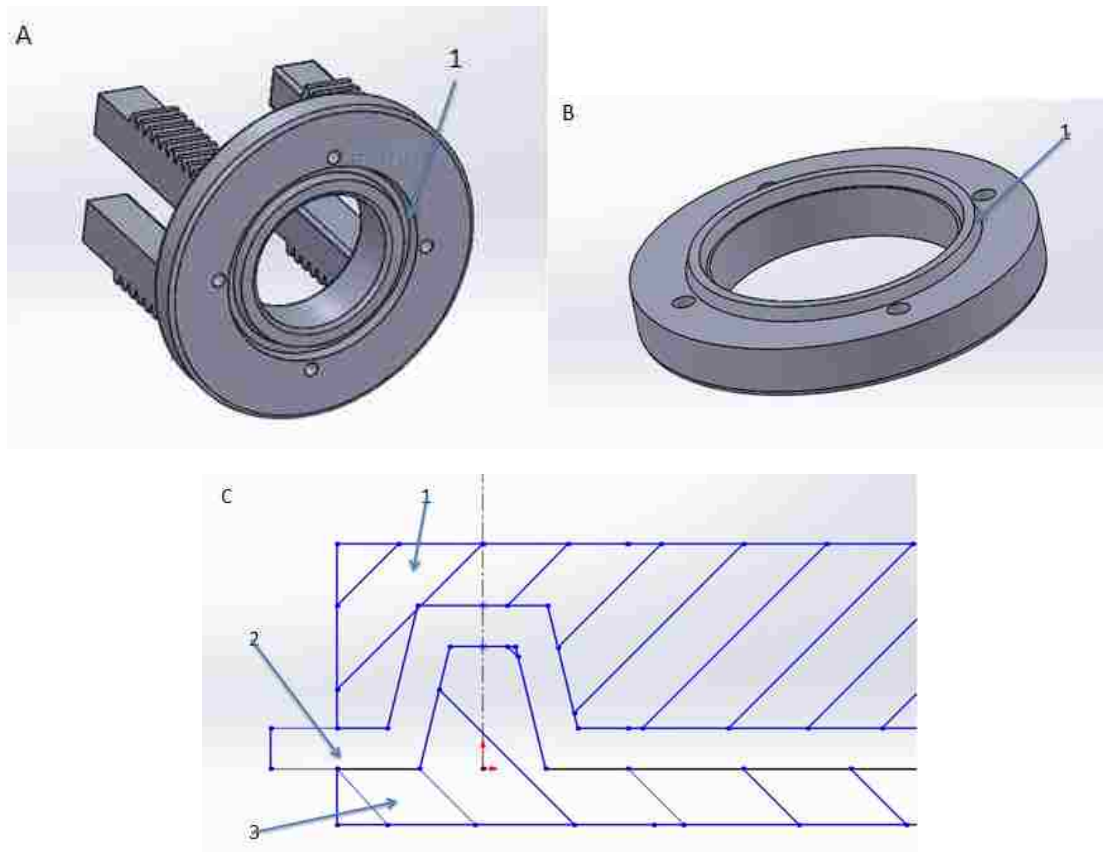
New design to solve leakage: A-1.Groove on gear rack plate; B-1.Wall on anchor plate; C-1.gear rack plate; C-2.Membrane; C-3.Anchor plate
